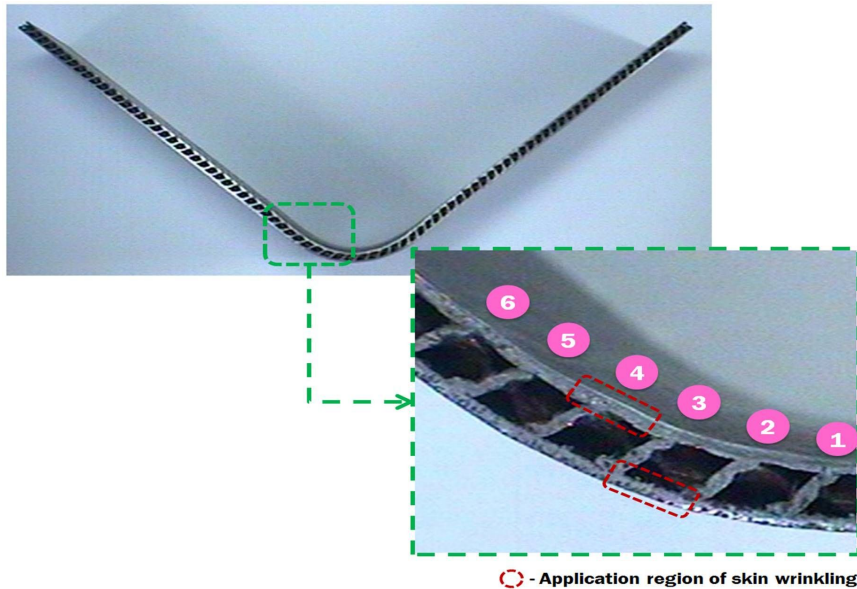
Deformed shapes of specimen subjected to plane strain drop impact loading
